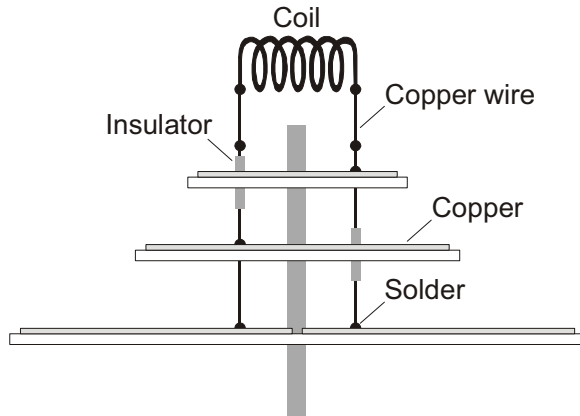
Connecting the coil to the three coaxial printed circuit board disks
